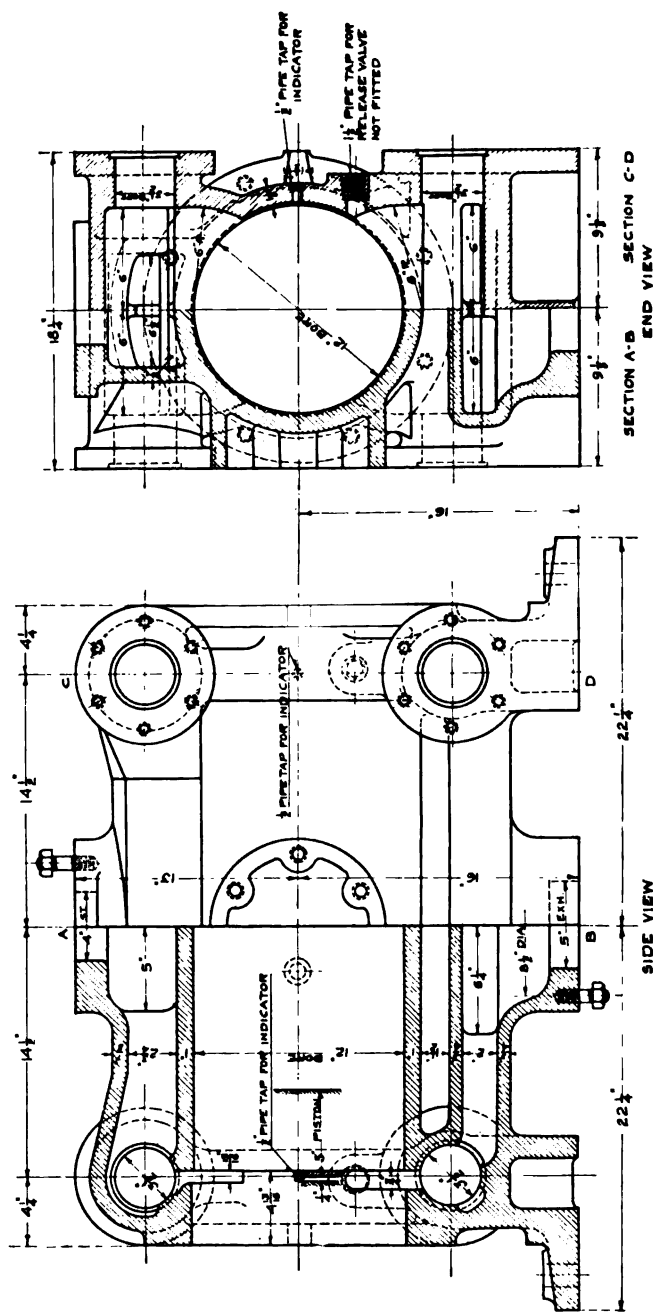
SECTIONAL VIEWS OF CYLINDER OF 18-IN. X 24-IN. CORLISS ENGINE
